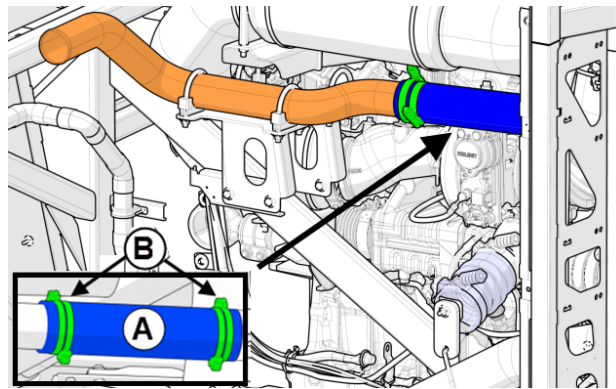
REINSTALL THIS EXHAUST PIPE SECTION
